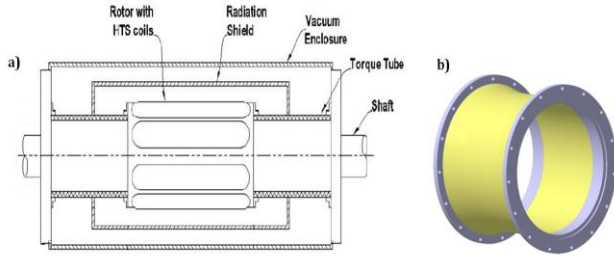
(a) Schematic of HTS motor assembly, (b) 3D model of a composite torque tube.
